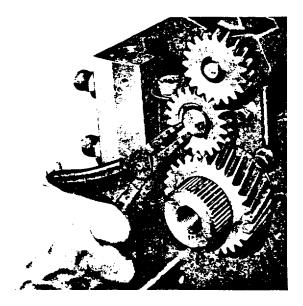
Removing the Oil Pump Idler Gear Retaining Circlip.
